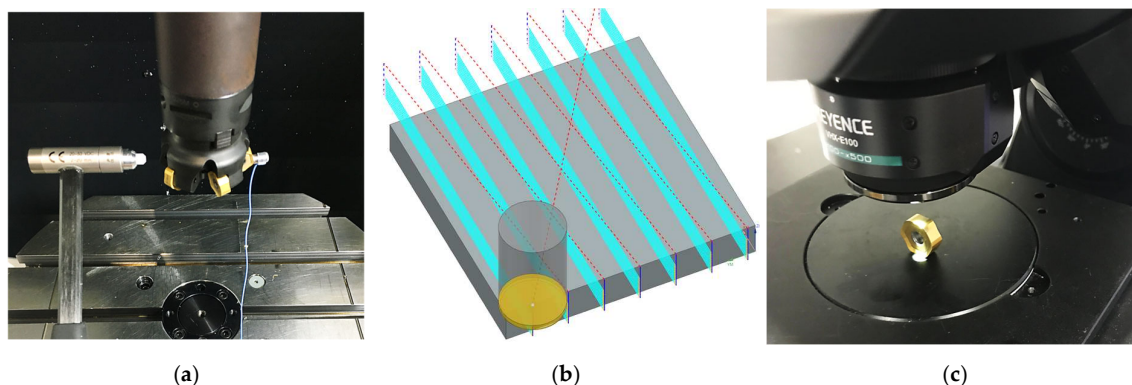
(a) Tap testing of face mills, (b) zig cutting strategy for machining tests, and (c) flank wear measurements under microscope.
